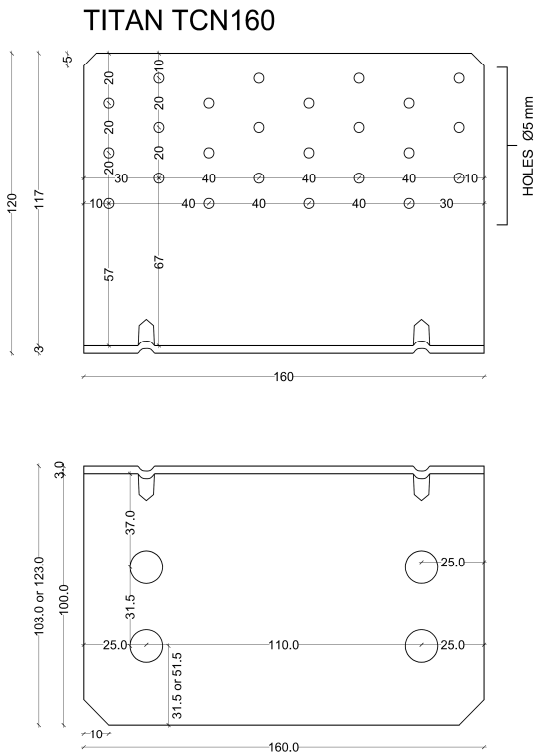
Dimensions of Angle Bracket Titan TCN160
